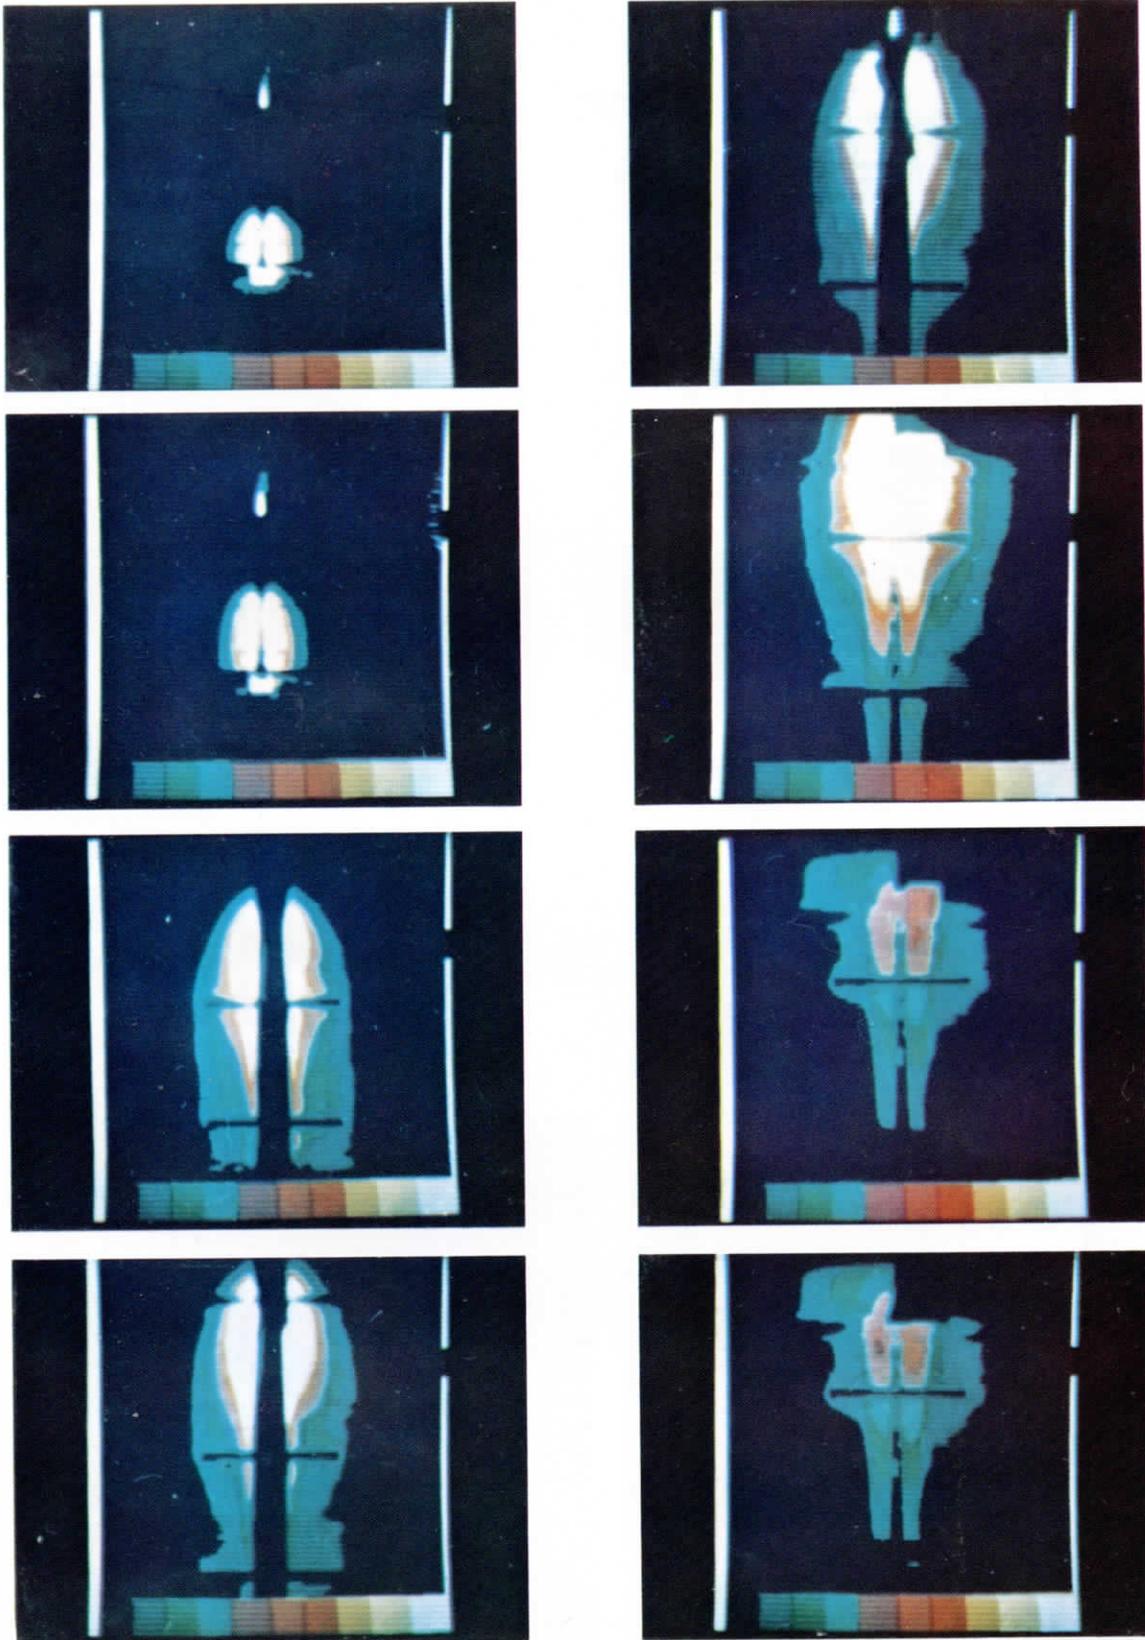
Series of thermographs showing progress of thermal pattern spreading away from the electroslag weld as the welding progresses.
